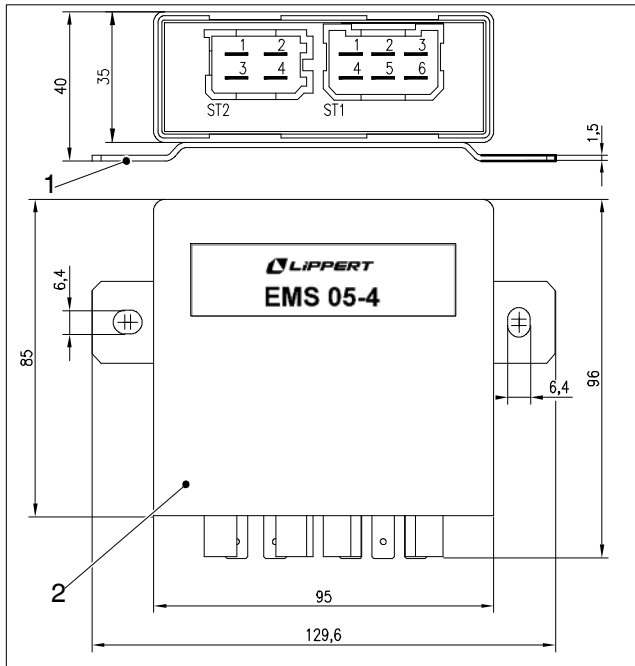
EMS 05-4 step controller (dimensions in mm)
